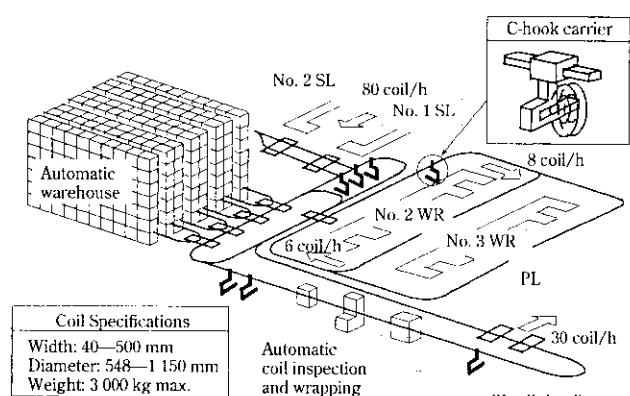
Layout of Mizushima Works electrical steel finishing line
